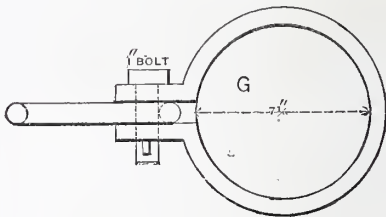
Ring near Head of Mast, to Hold Boom Tackle.
